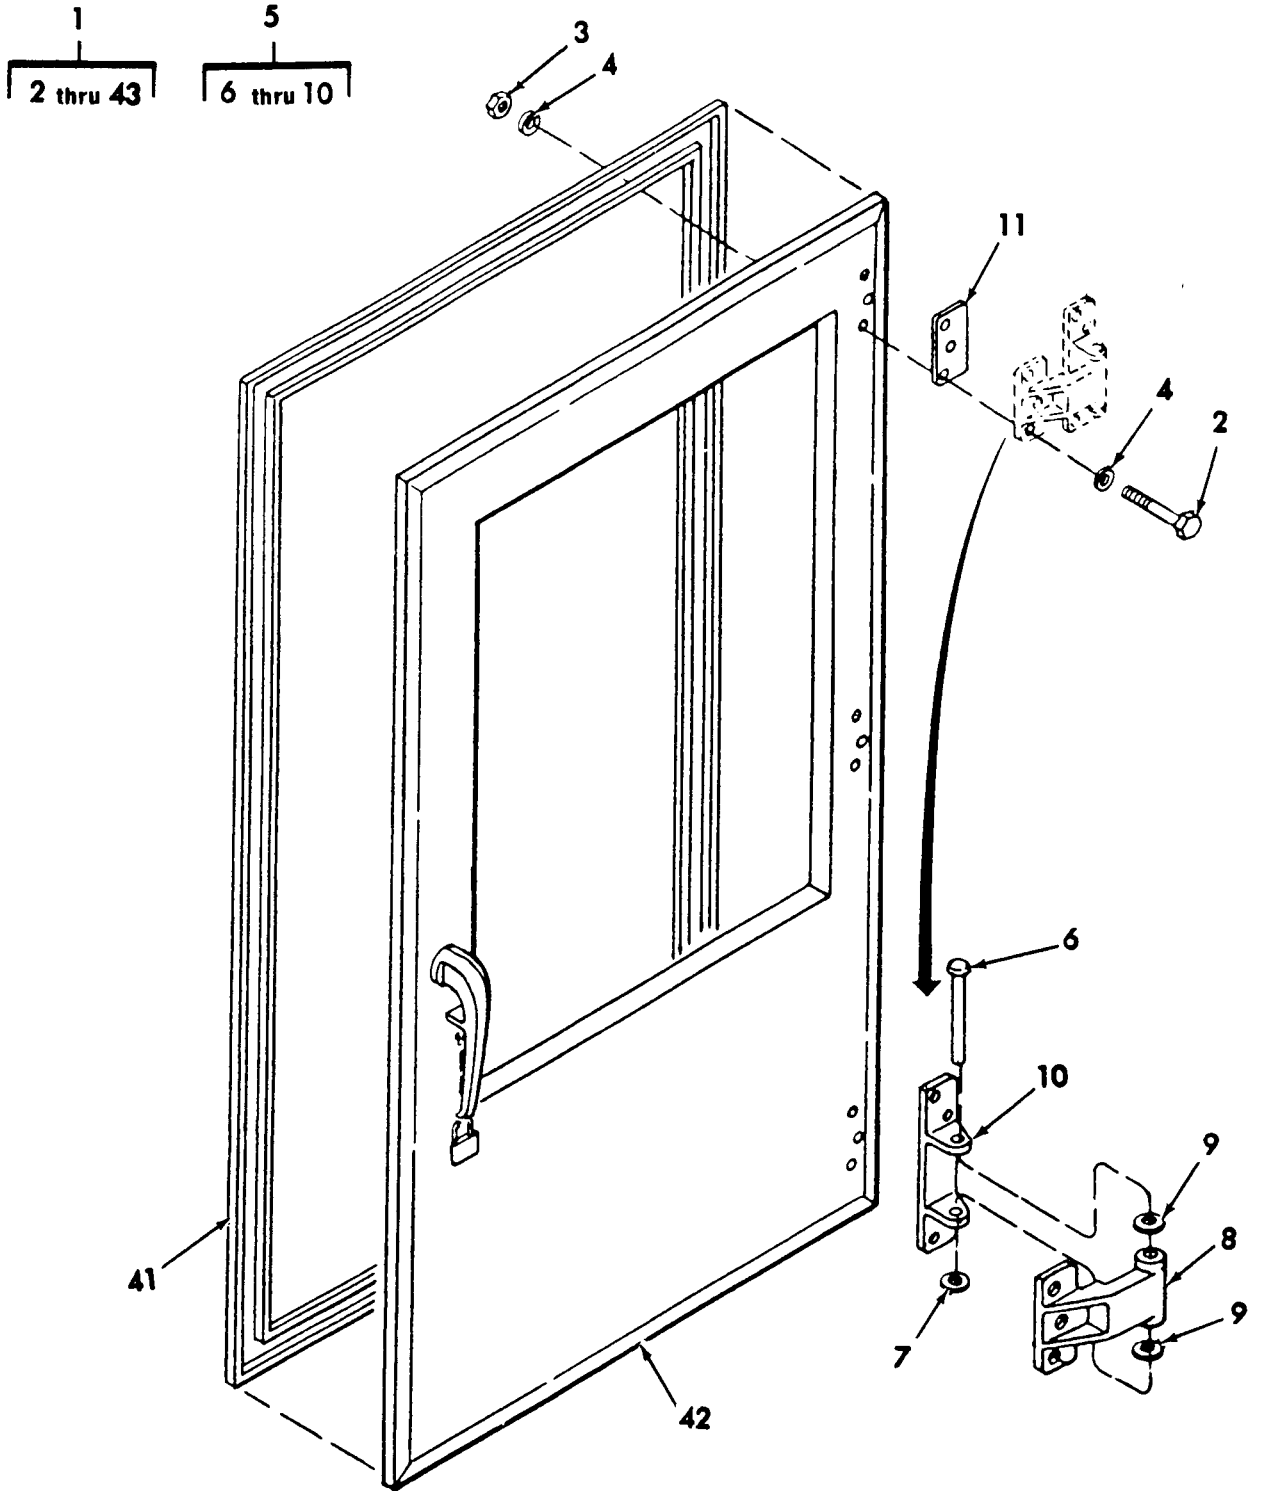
Outer Door Assembly (Sheet 1 of 2)
